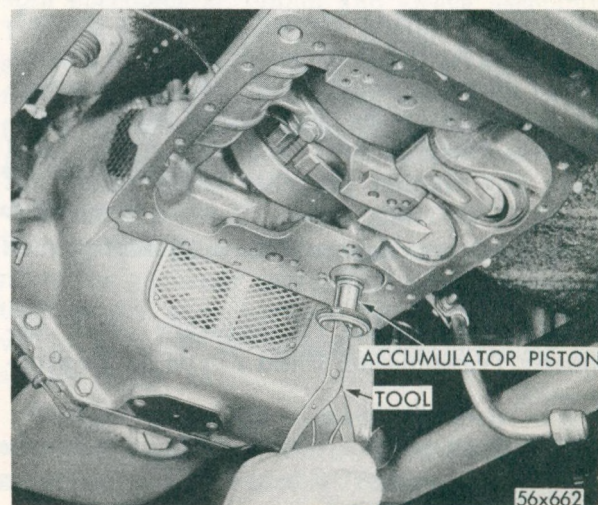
Removal and Installation of Accumulator Piston (Typical View)
